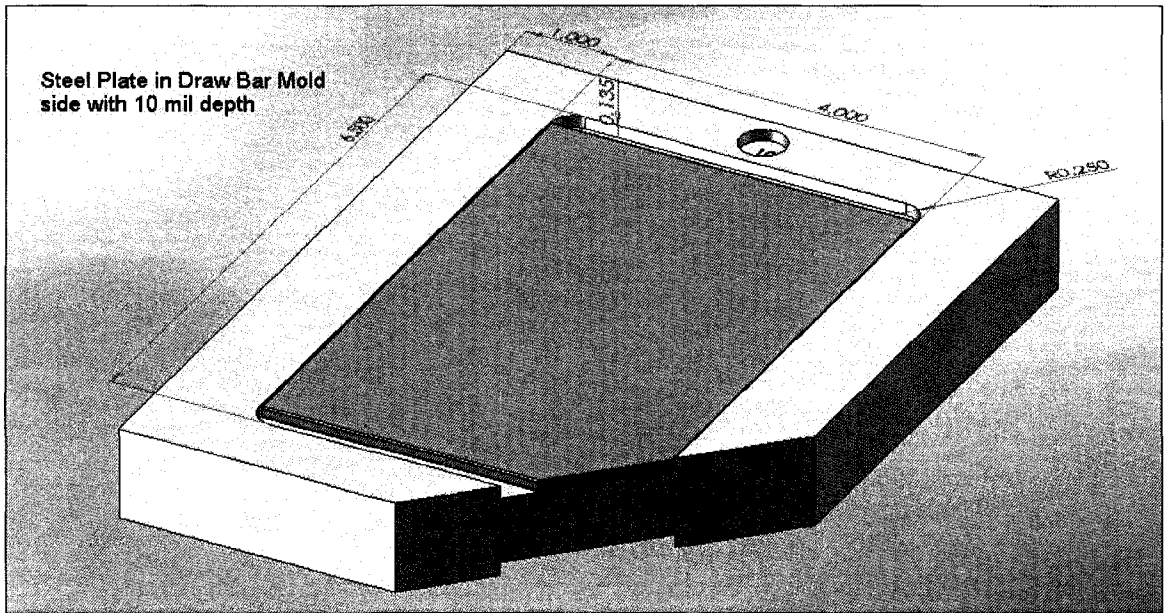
Draw Bar Over Plate Mold with Dimensions
